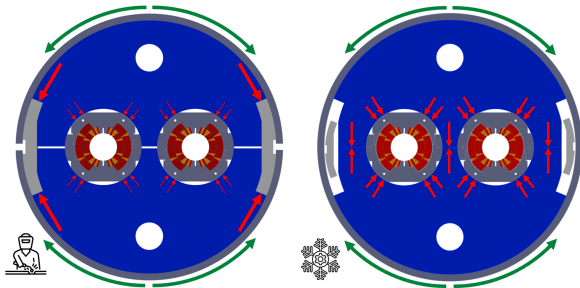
Assembly steps overview. The red arrows show how the contact forces are exchanged between the components. On the left during welding and on the right at cold. The green arrow represents the azimuthal stress on the shell due to welding.
